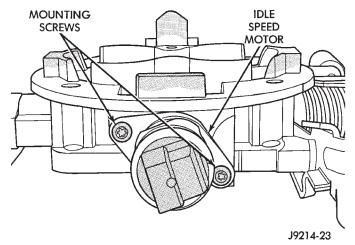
Mounting Bolts (Screws)—IAC Motor—5.2L/ 5.9L Engines—Typical
